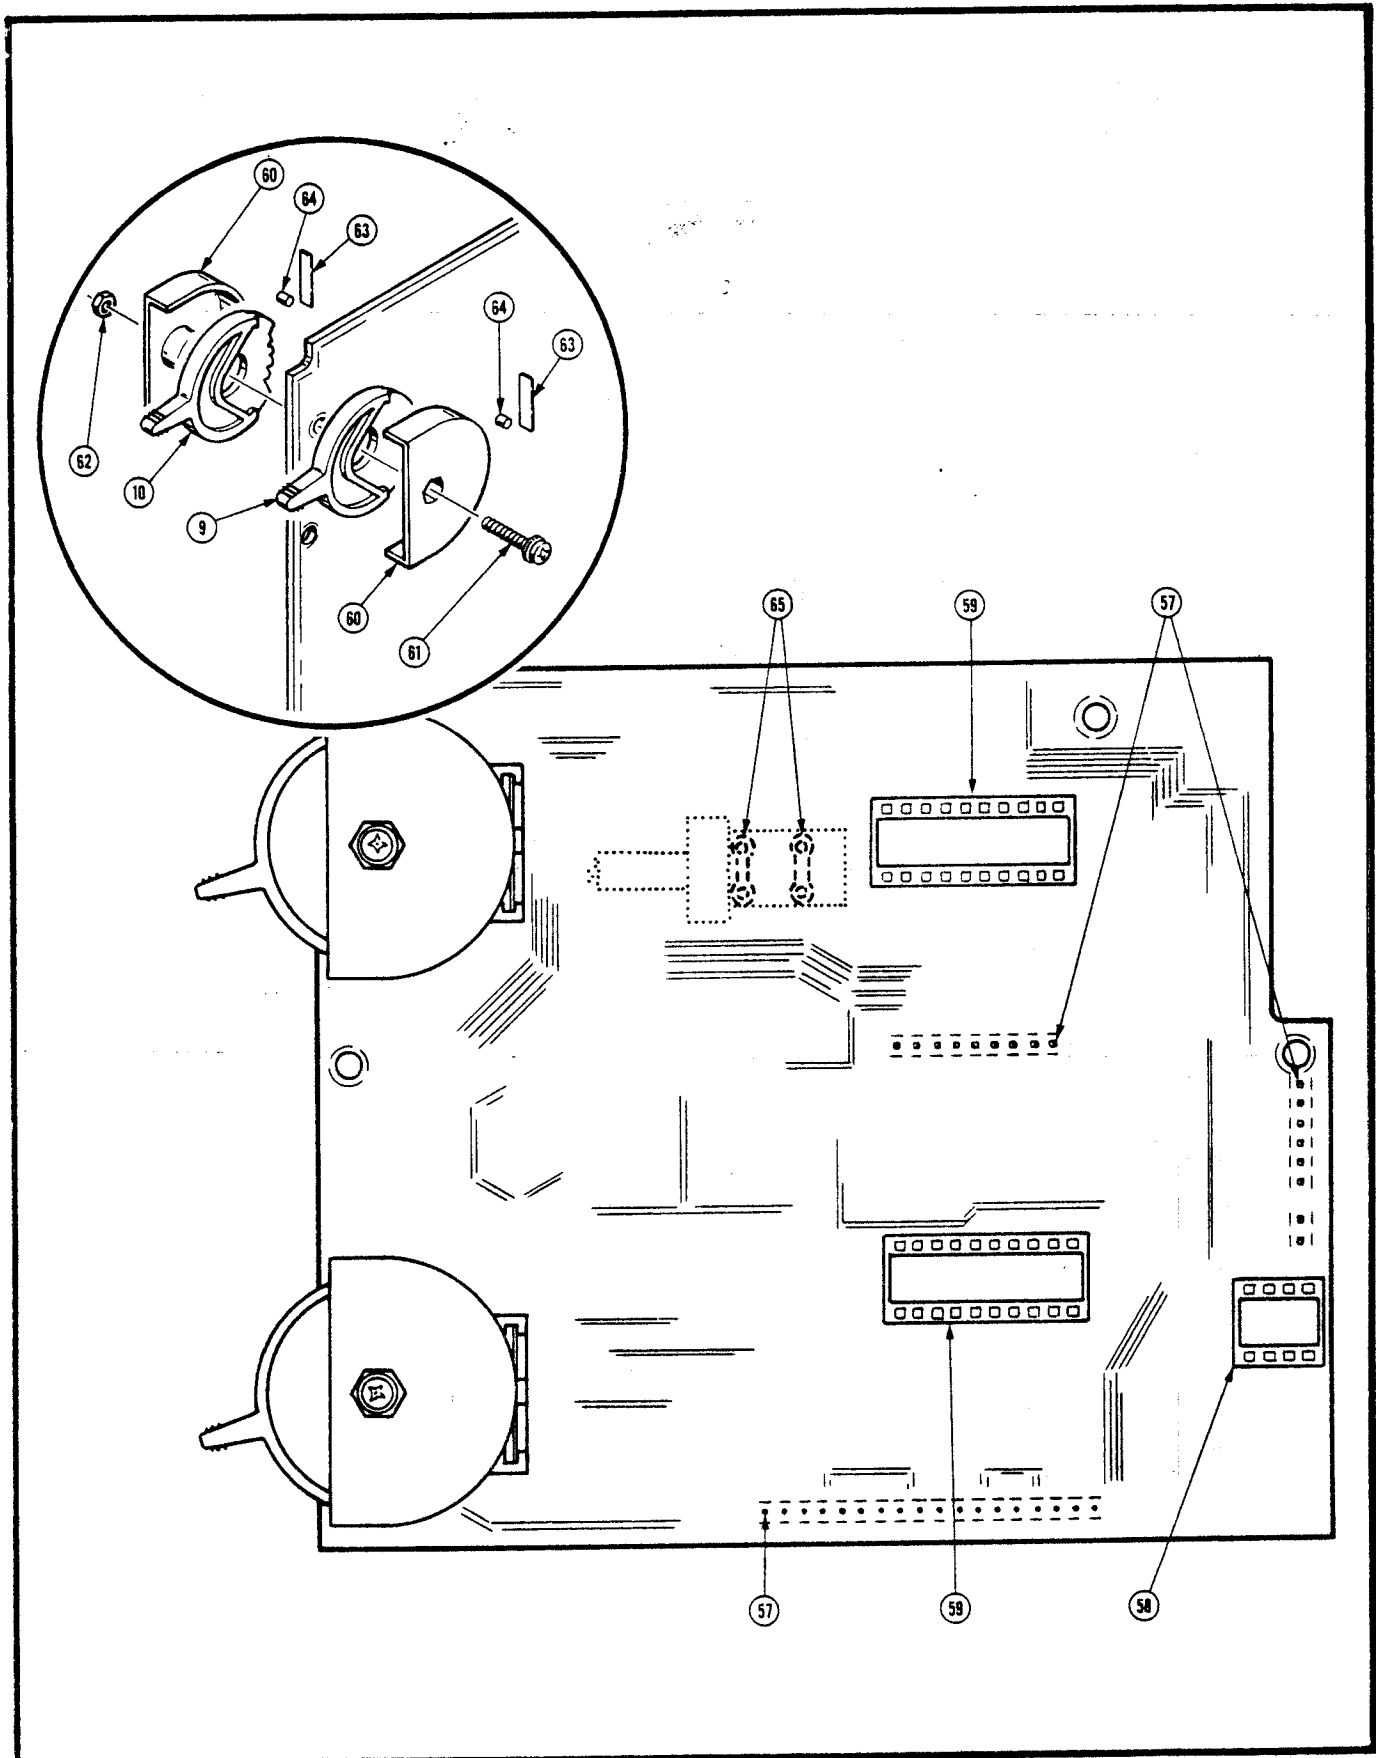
A7 Circuit Board Assembly, Trigger (sheet 3 of 3).
